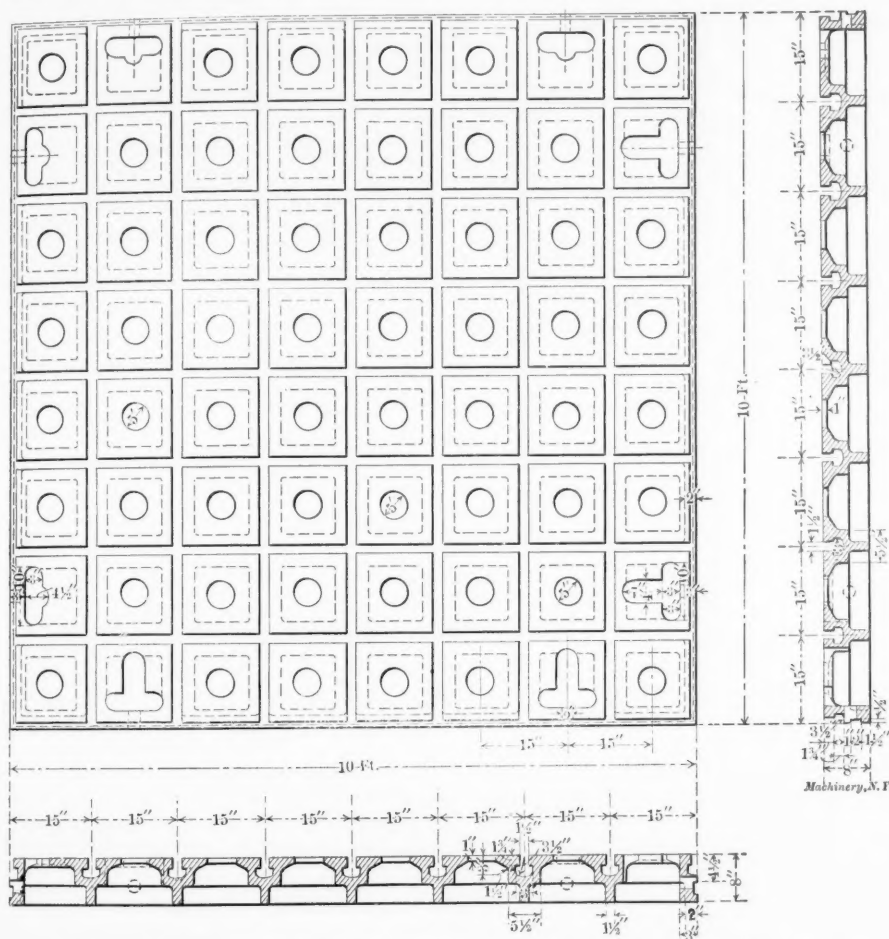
Detail Drawing of the Floorplate Section used by the General Electric Company in their New Buildings.
